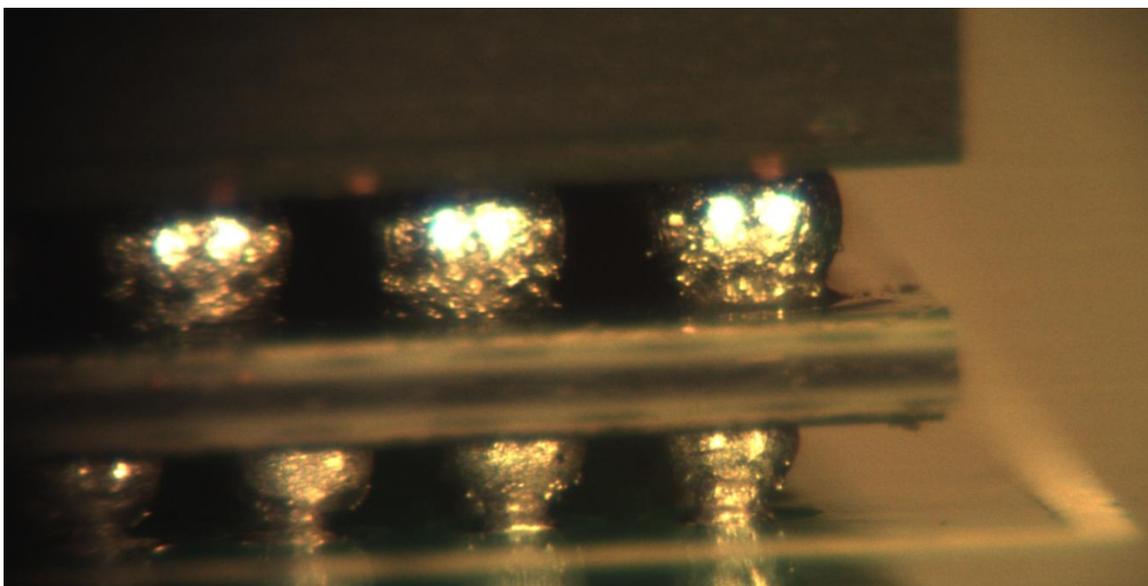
Solder reflow defect: Improper reflow due to low peak temperature and less TAL resulting in un-collapsed solder joints
